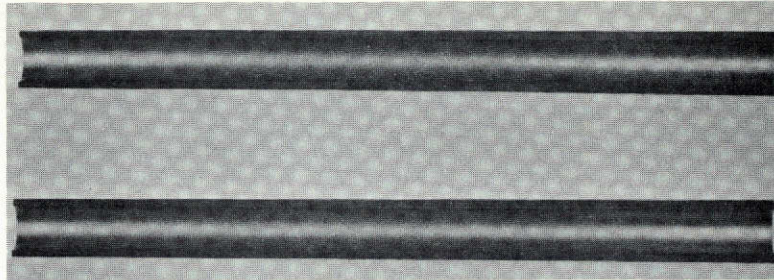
LONGITUDINAL CROSS SECTION OF SLEEVE IN FIGURE 7 ILLUSTRATING ABSENCE OF O.D. OR I.D. SPALLED AREAS (1X)
